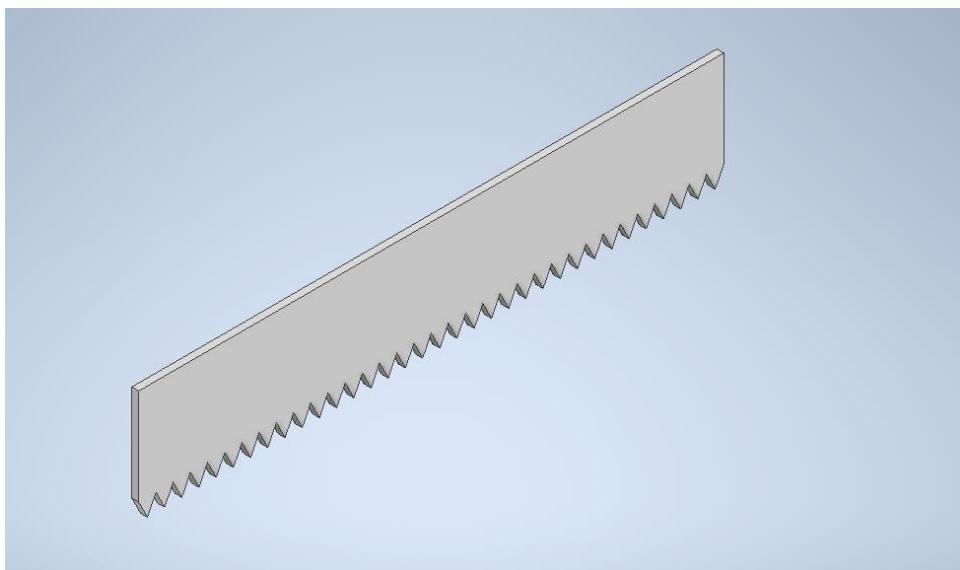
Blade that attaches to slicer insert (3 identical blades)
